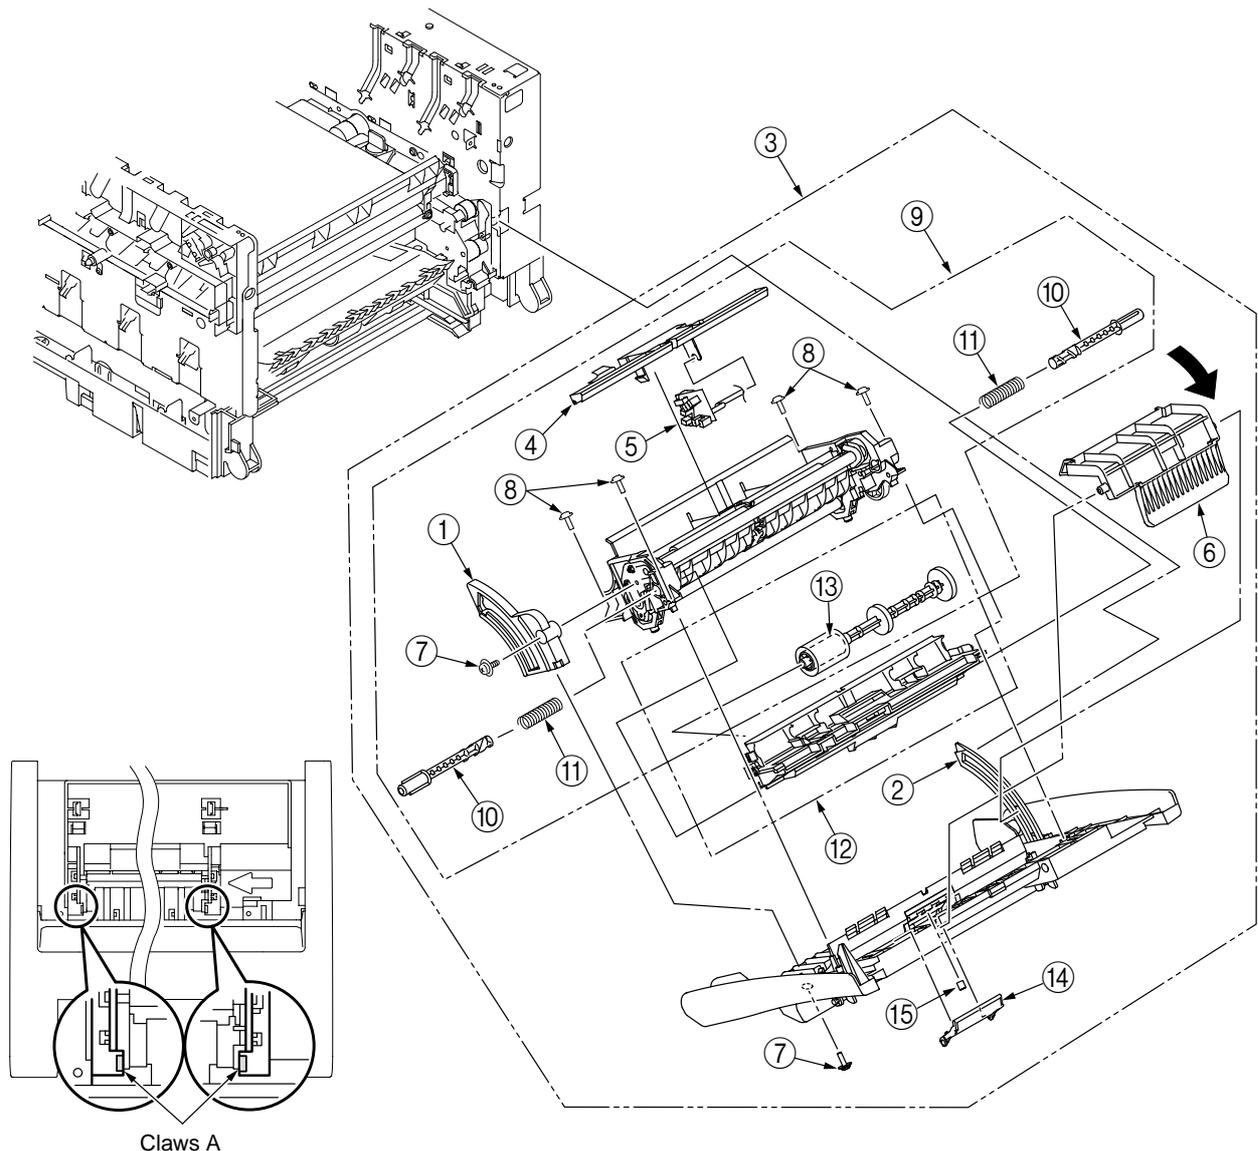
Feeder Unit / Board-RSF / MPT Hopping Roller / MPT Frame Separator / Cover-Front
